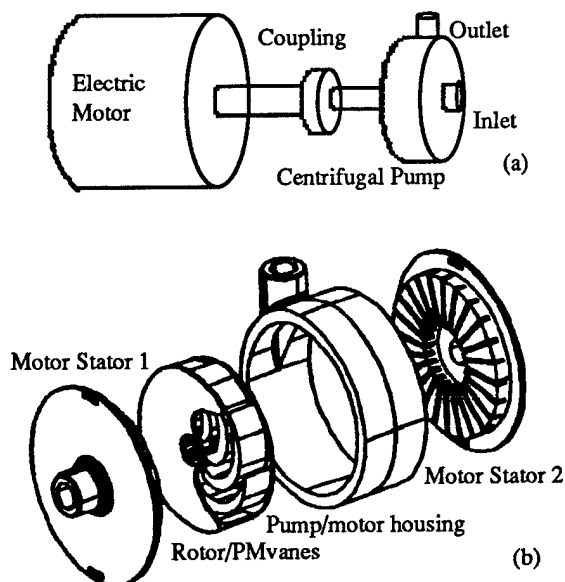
(a) Traditional motor pump set and (b) exploded view of proposed integrated motor/pump system.
